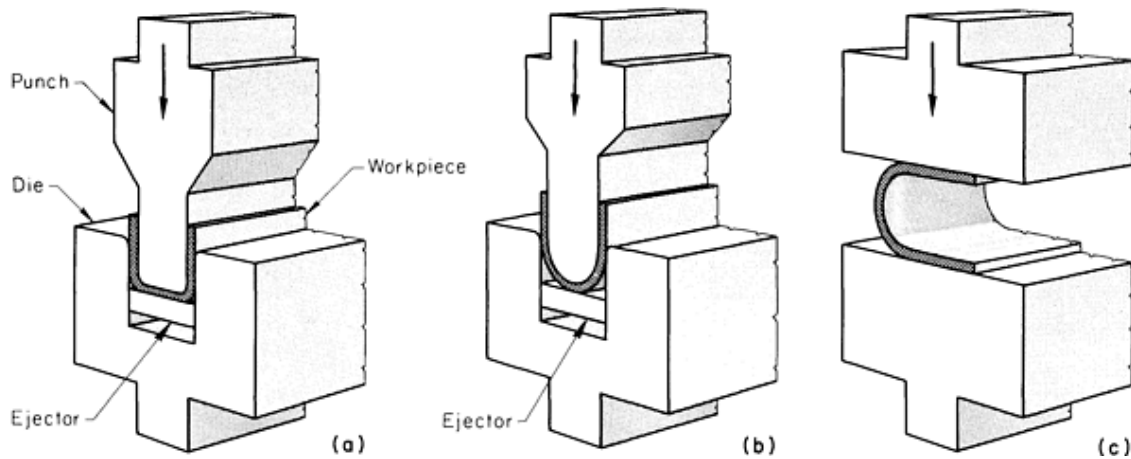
Three types of special punches and dies for press-brake forming. (a) Forming a channel in one stroke. (b) Forming a U-bend in one stroke. (c) Flattening to remove springback after U-bending.
